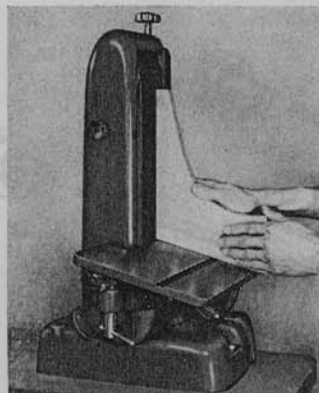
Angular sanding with Belt Sander mounted in a vertical position and disc sanding table mounted to it.
